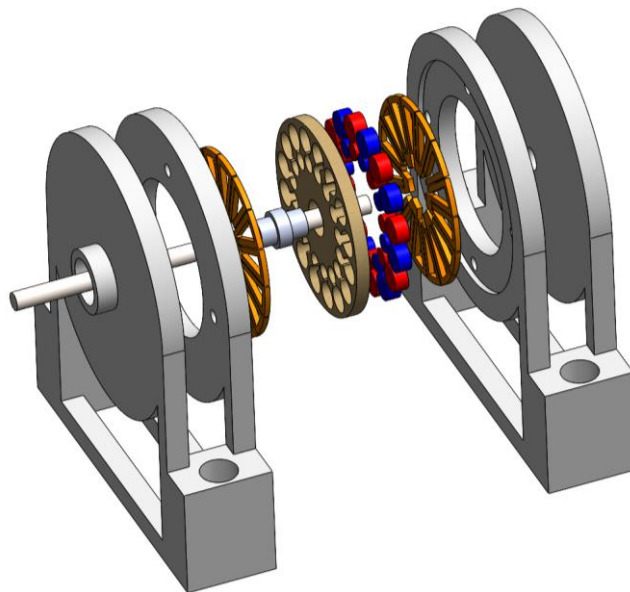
Exploded view of the of the prototype and assembly with supports
